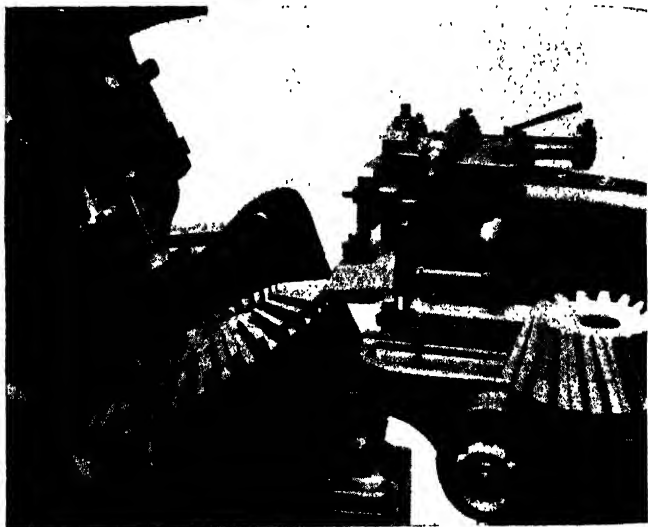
View of Reinecker Machine Cutting Crown Gear.
